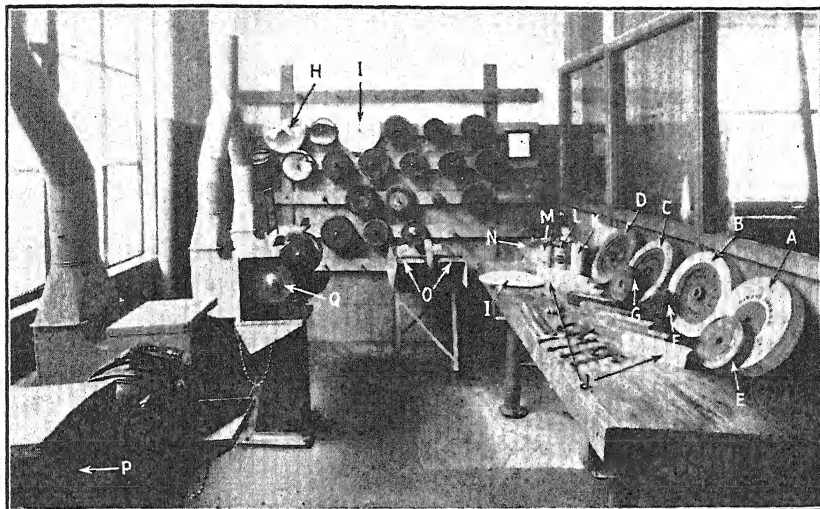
The Polishing and Buffing Room of the Machine Tool Laboratory.
